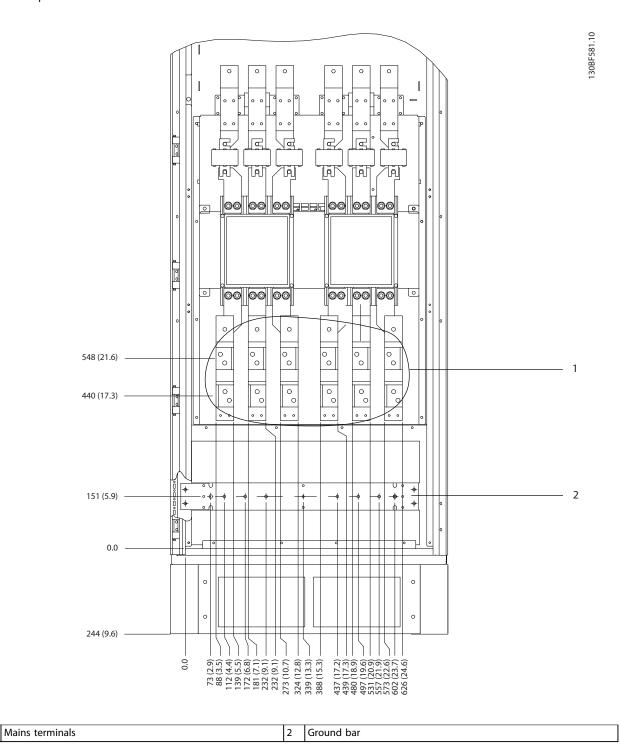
Terminal Dimensions for F11/F13 Options Cabinet, Front View
